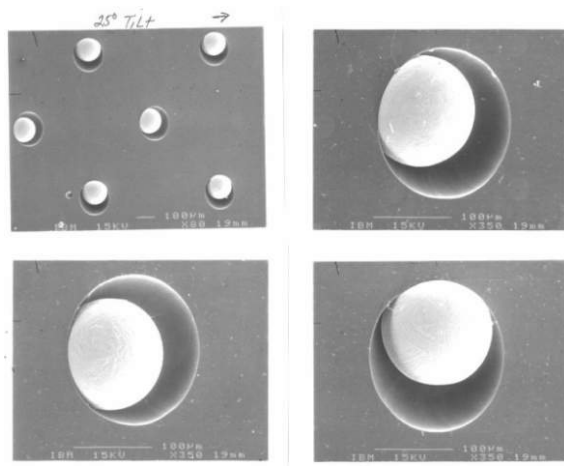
Reflowed solder spheres in glass mold cavities prior to transfer to wafer [22].
